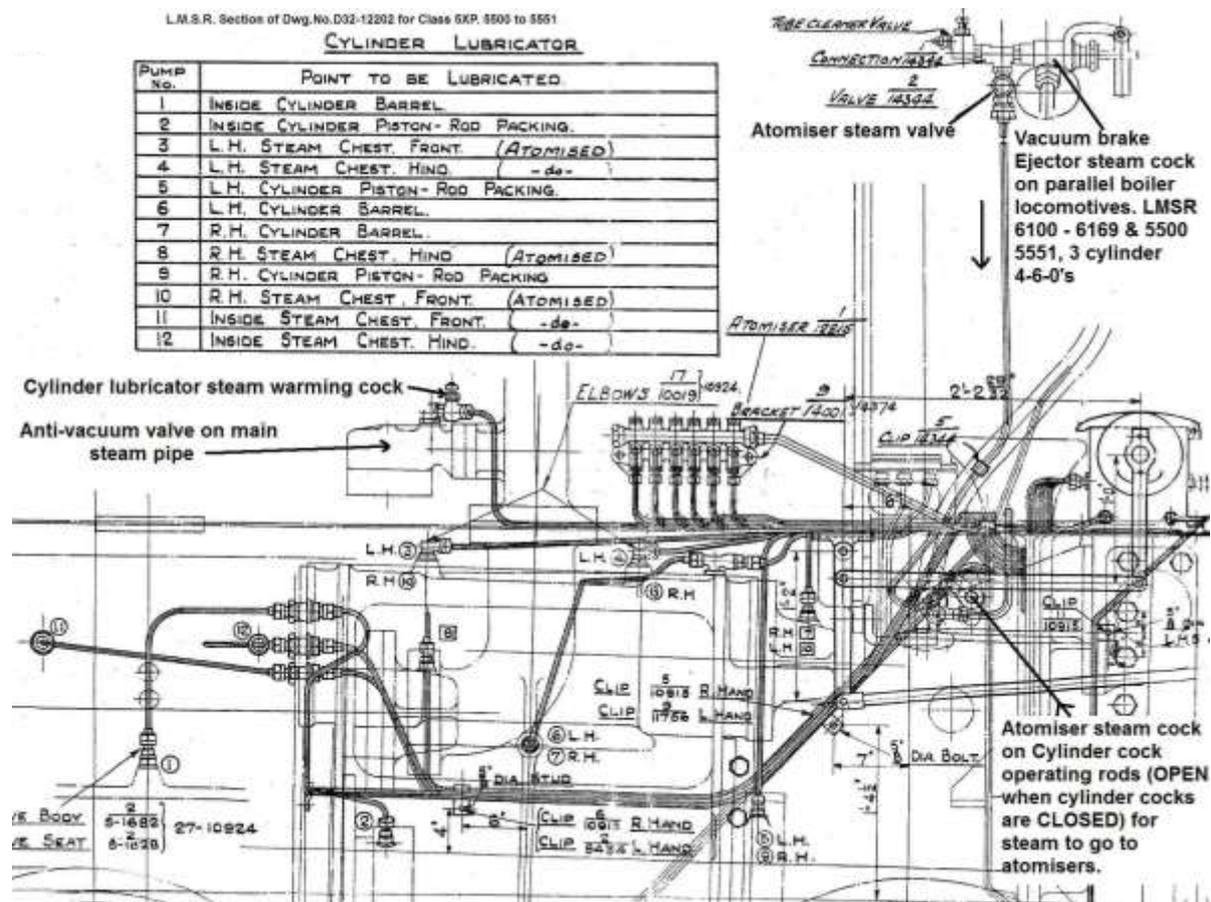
left-hand side view of the cylinder mechanical lubricator and atomisers from LMS Drawing D32-12202 (locomotives 5500 to 5551).
